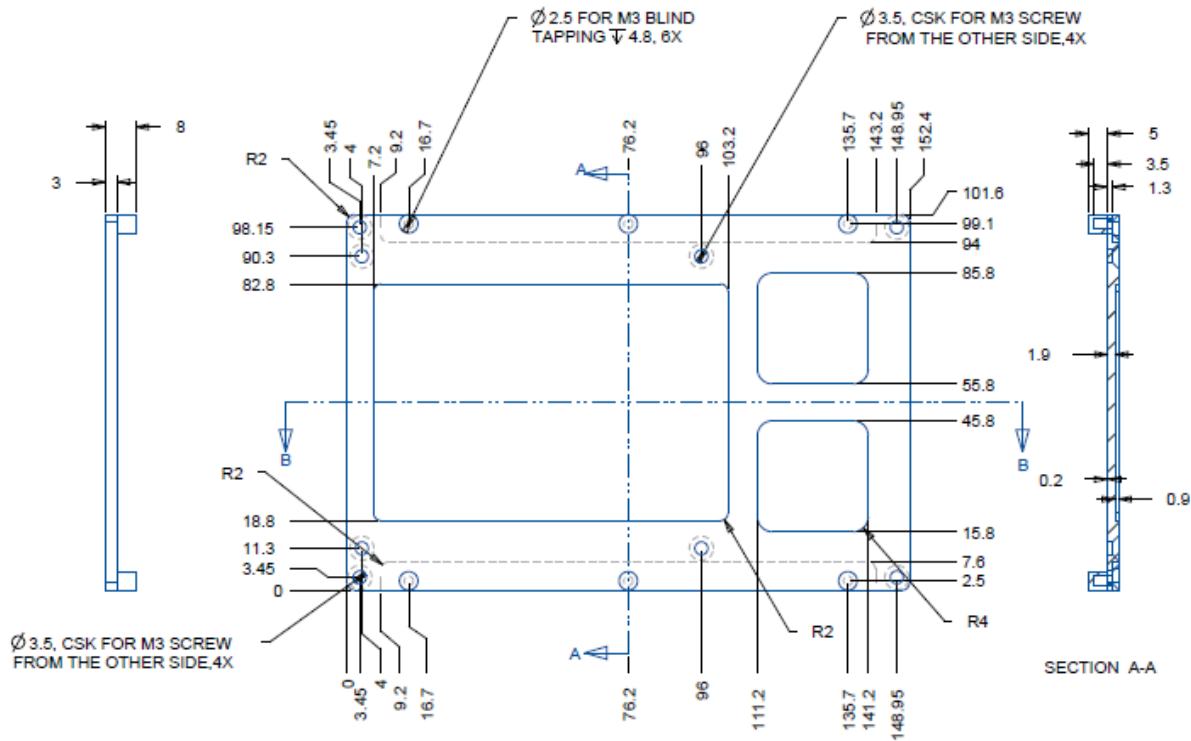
Schematic Bottom View of the Heat Spreader
